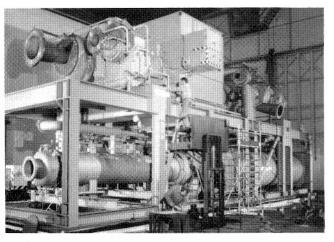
Two Casing IGTM Package (Compressor and Expander) with Electric Motor for a DMT Plant $V_c/V_E = 120,000/80000$ Nm³/h; $P_c/P_E = 17000/6000$ kW.
